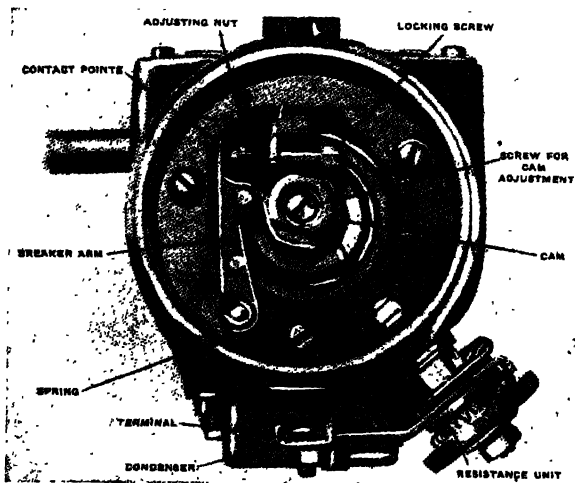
Distributor Base, Showing Resistance Unit and Contact Points.
